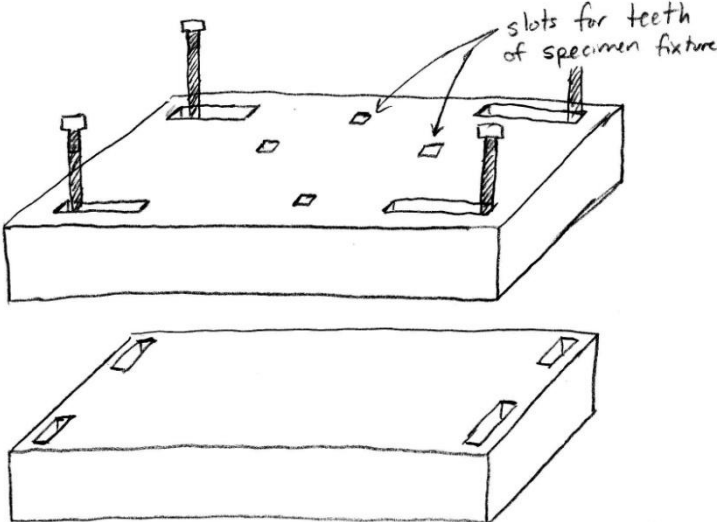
Ball Joint and Two Plates for x-y Plane Alignment
